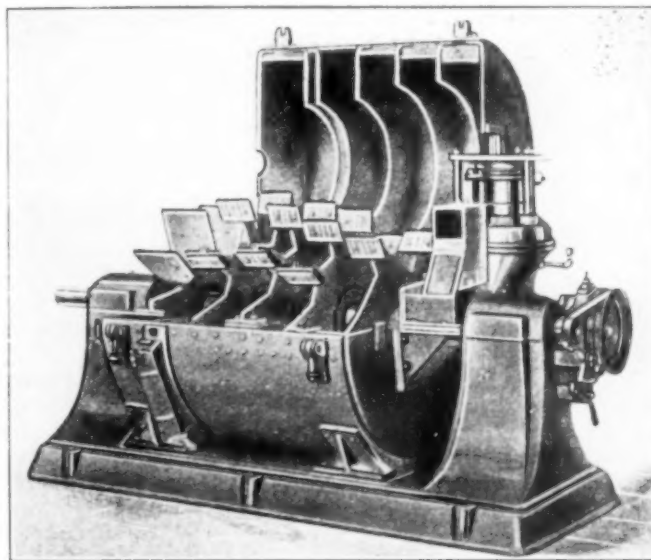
AERO-PULVERIZER, A COAL-PULVERIZING AND FEEDING MACHINE
